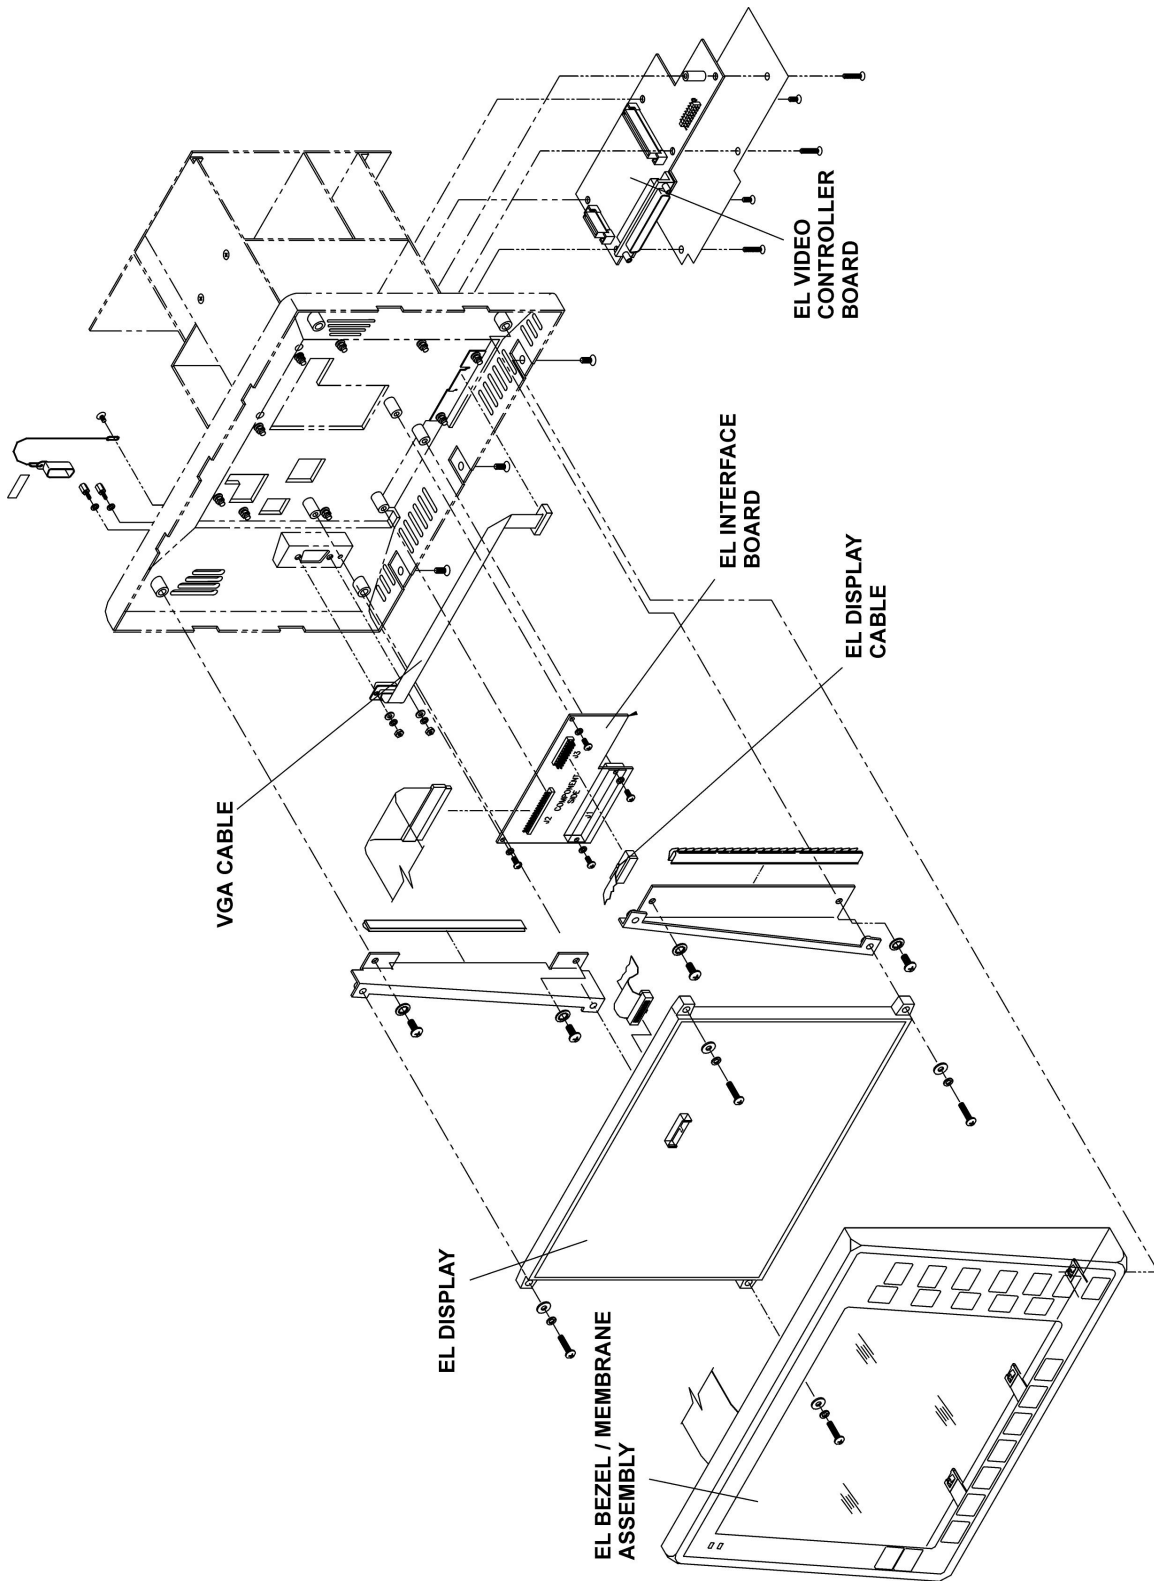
PRISM EL Display Assembly (CPU Board 403023 ONLY)
